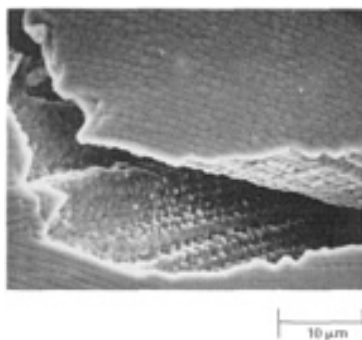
SOLIDIFICATION CRACK IN A PULSED ND:YAG LASER WELD JOINING HASTELLOY C-276 TO 17-4 PH STAINLESS STEEL. YAG, YTTRIUM-ALUMINUM-GARNET
